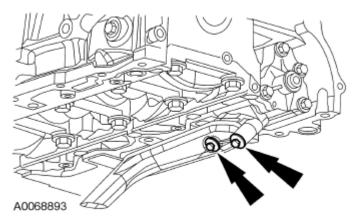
Locating Bolts, Oil Pump Pickup Tube And Gasket
